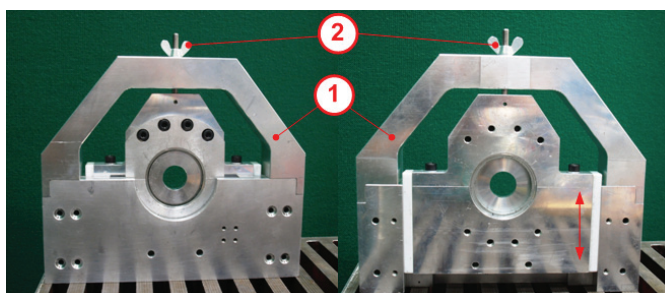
PMB in housing, front/back. 1 - stator top frame, 2 - vertical offset adjusting nut.
